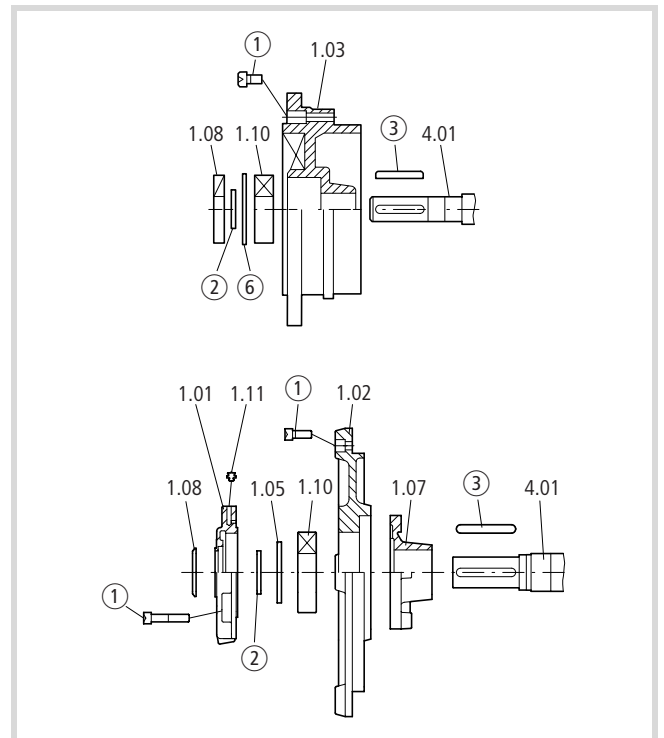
Position of DE shaft seal (1.08) and external DE bearing cover (1.01)
